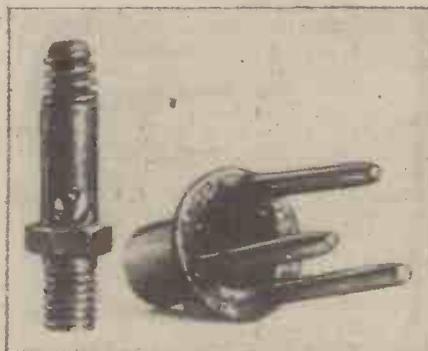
Showing the corrosion of expansion valve needle, seat, and push-rods, due to acid formed by moisture in the system.
